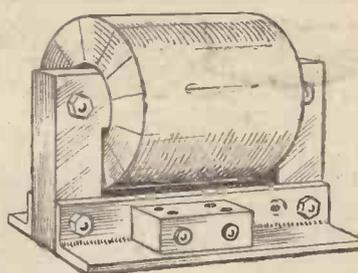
Stampings and coil assembled, showing air spaces at the sides.
